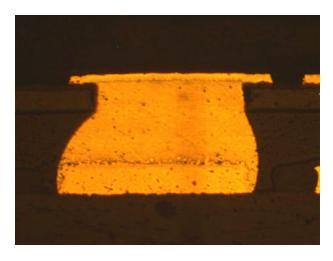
A Reworked Package B Solder Joint (Soldering Iron and Wick Site Redress)
